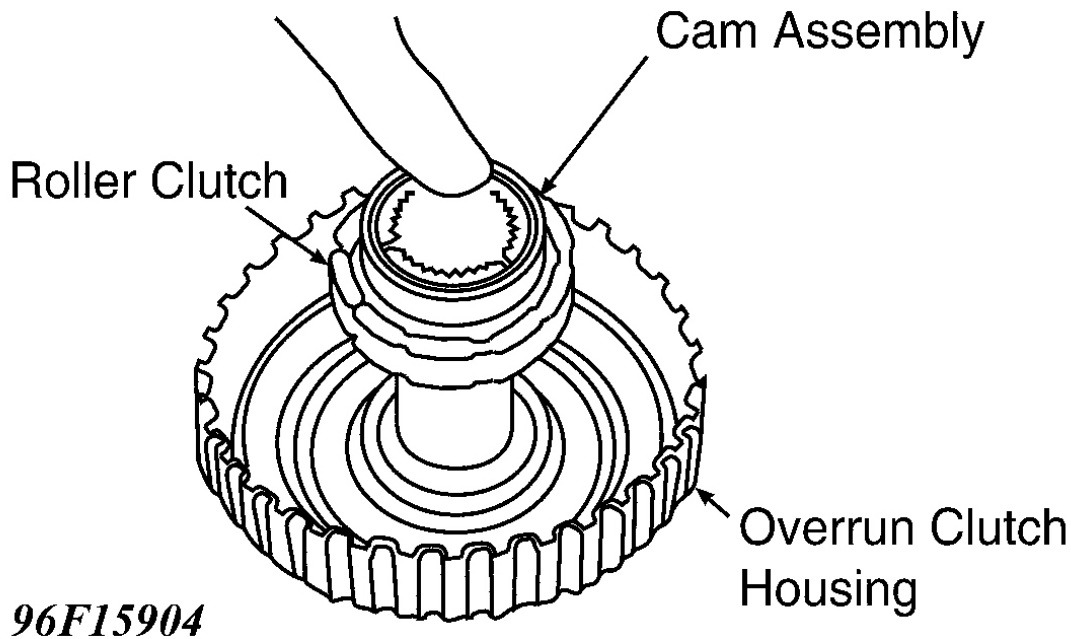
Removing Overdrive Roller Clutch Cam Assembly
